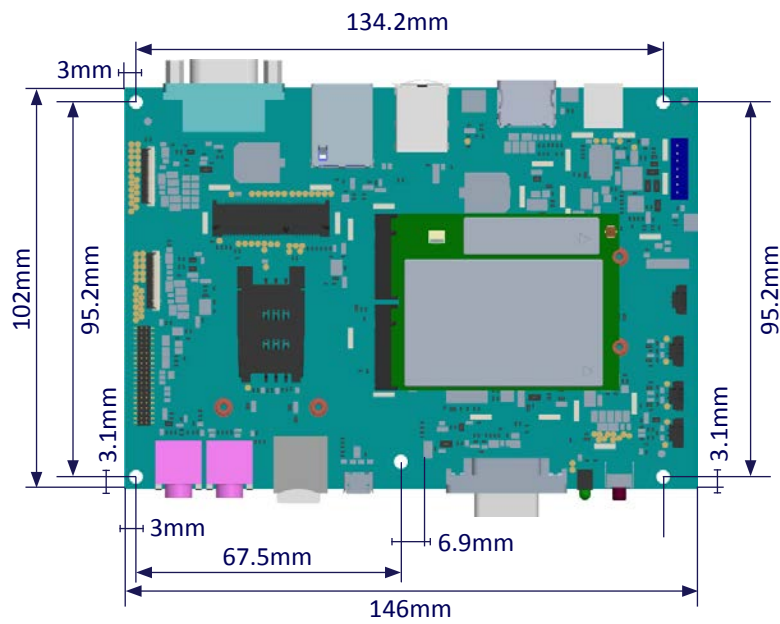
Dimensions of the VIA VAB-3000 board (top view)
